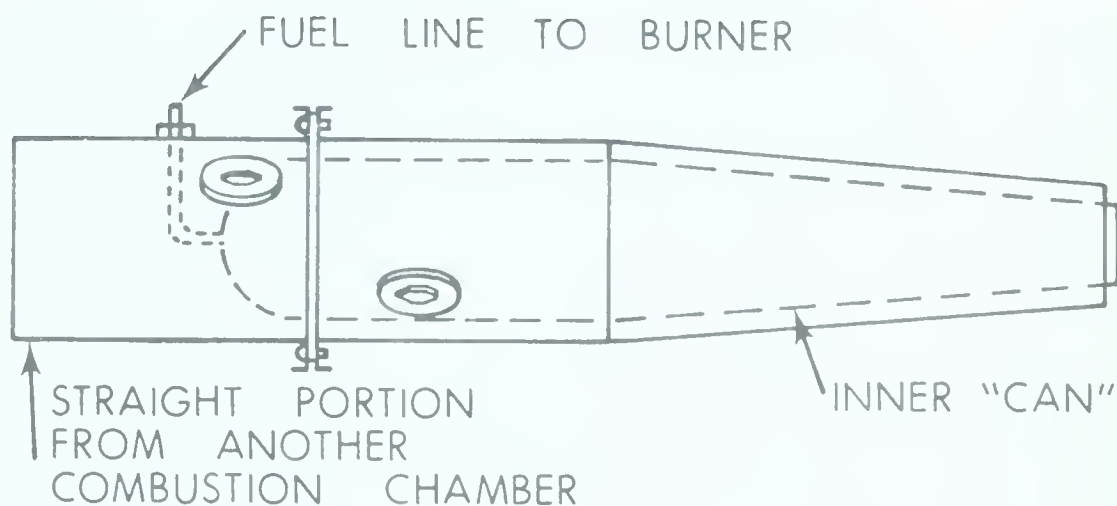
METHOD OF MODIFYING COMBUSTION CHAMBER
